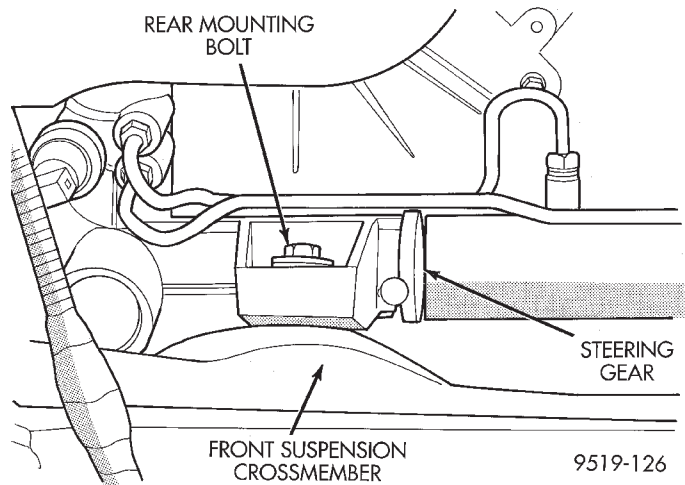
Steering Gear Rear Mounting Isolator Bolt
